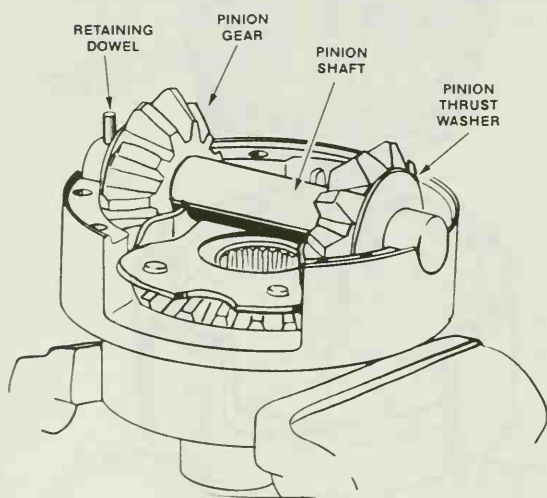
Installing parts in the case half. (Pontiac Motor Division of General Motors Corporation)
